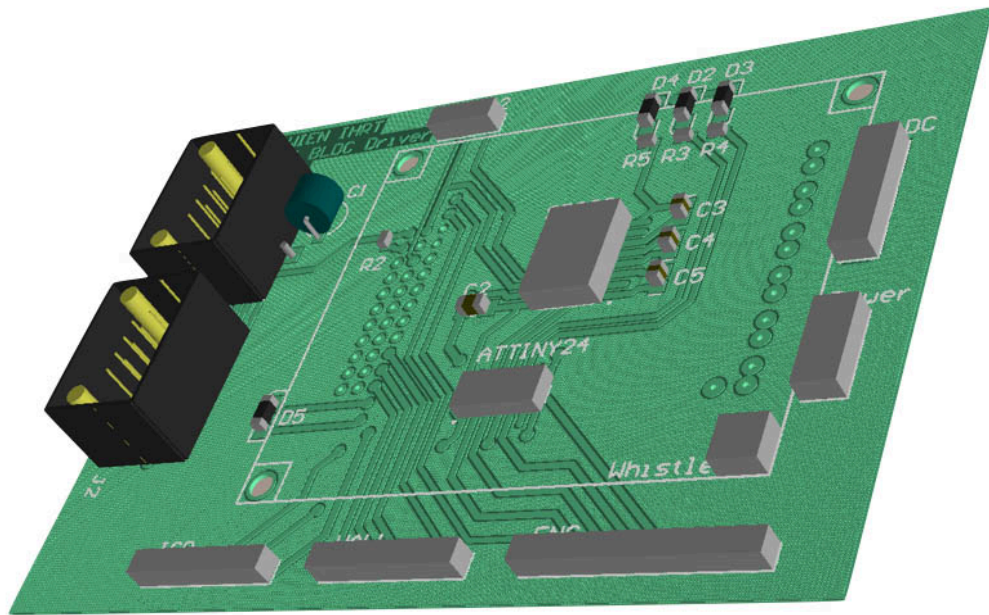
Front side 3-D view of the brushless motor driver during designing process
